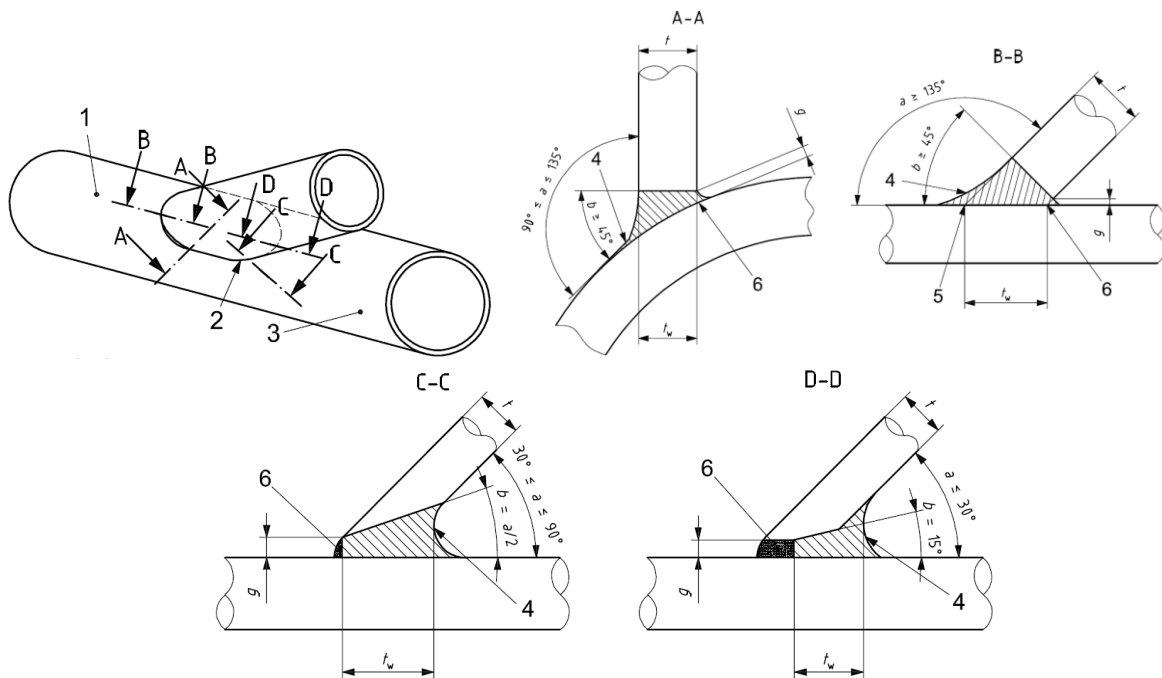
Welded tubular joint / shield metal arc welding- (ISO 19902, 2007).
